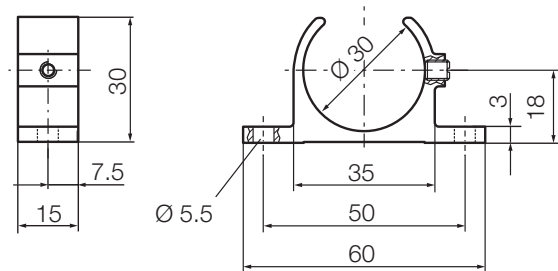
BTL6-A-MF01-A-50 mounting clamp
